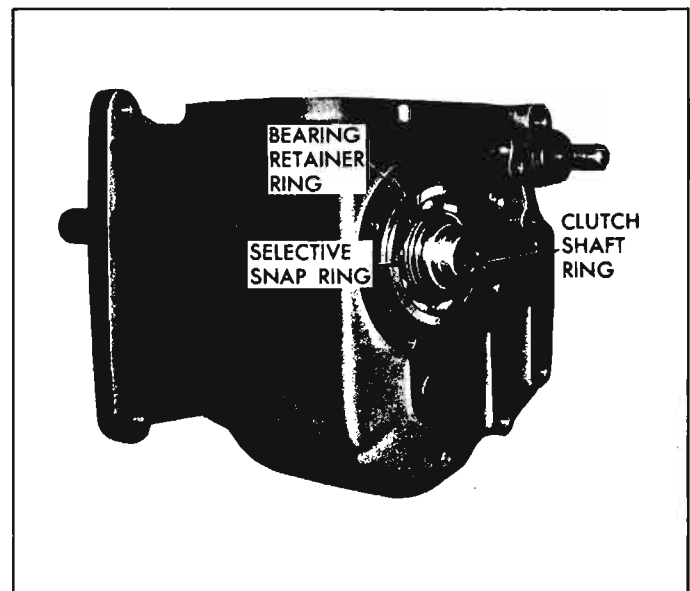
D-53—Clutch Gear and Bearing Snap Rings
